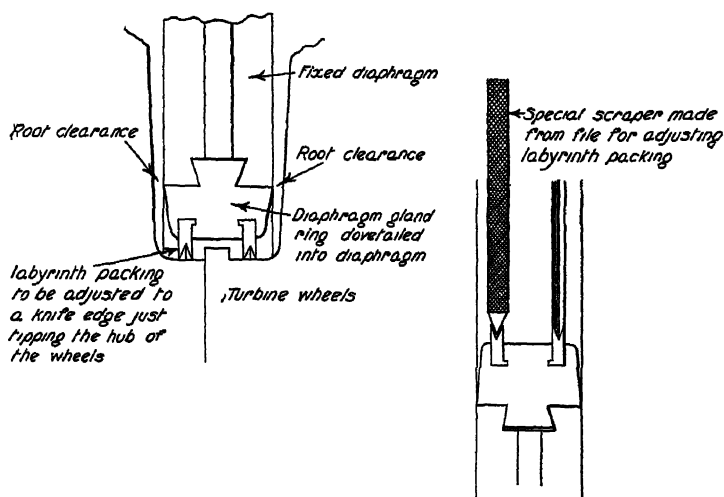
SHOWING ROOT CLEARANCE, ALSO LABYRINTH PACKING AND METHOD OF ADJUSTING SAME
